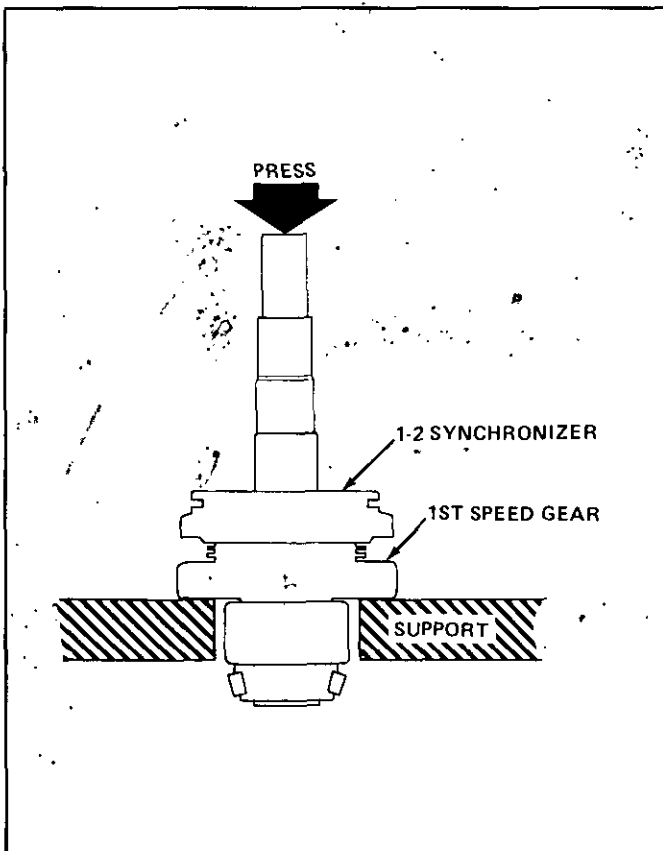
Removing 1-2 Synch. and 1st Gear (Output)
